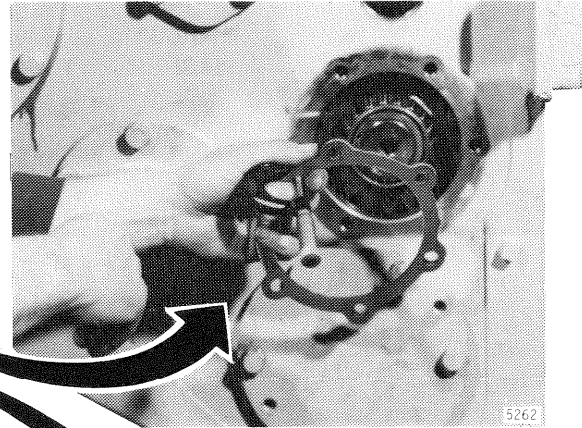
REASSEMBLY AND INSTALLATION OF CLUTCH SHAFT ASSEMBLY (Sheet 3 of 6)
